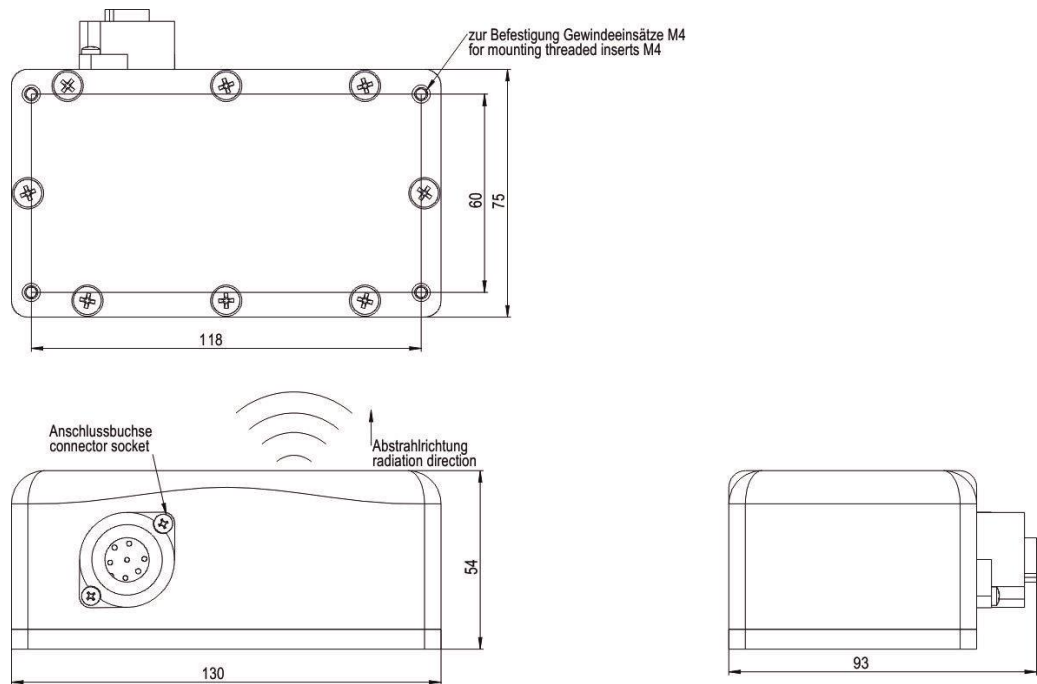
Dimensions, type OFR-G00/EV0 with housing
